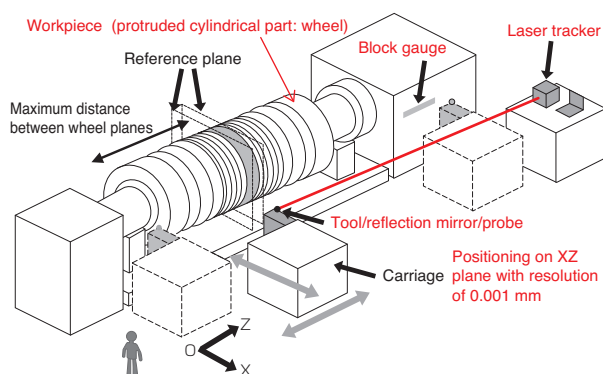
The developed on-machine measuring system for a steam turbine rotor on CNC turning machine
